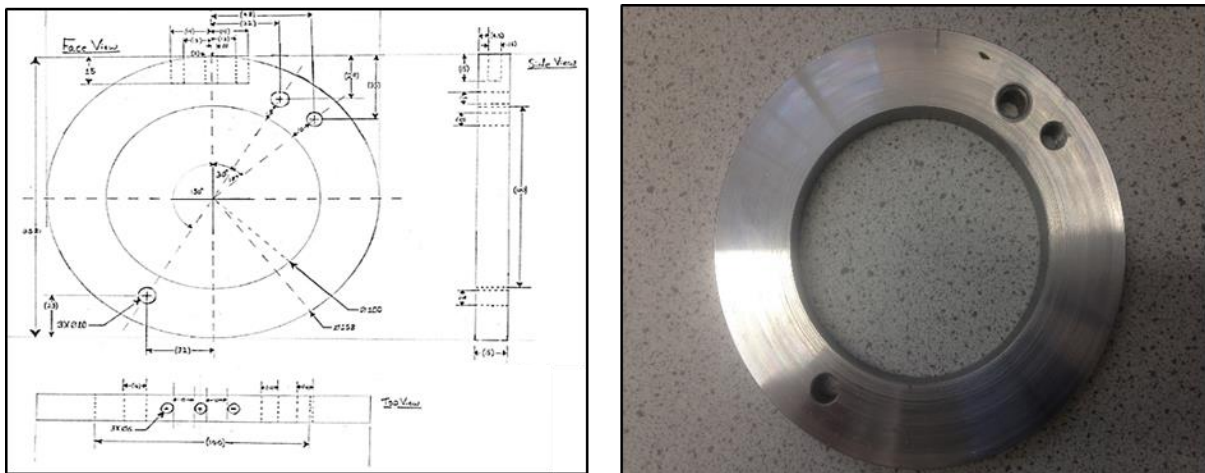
Technical drawing of the desired adapter and photograph of the final machined part.
